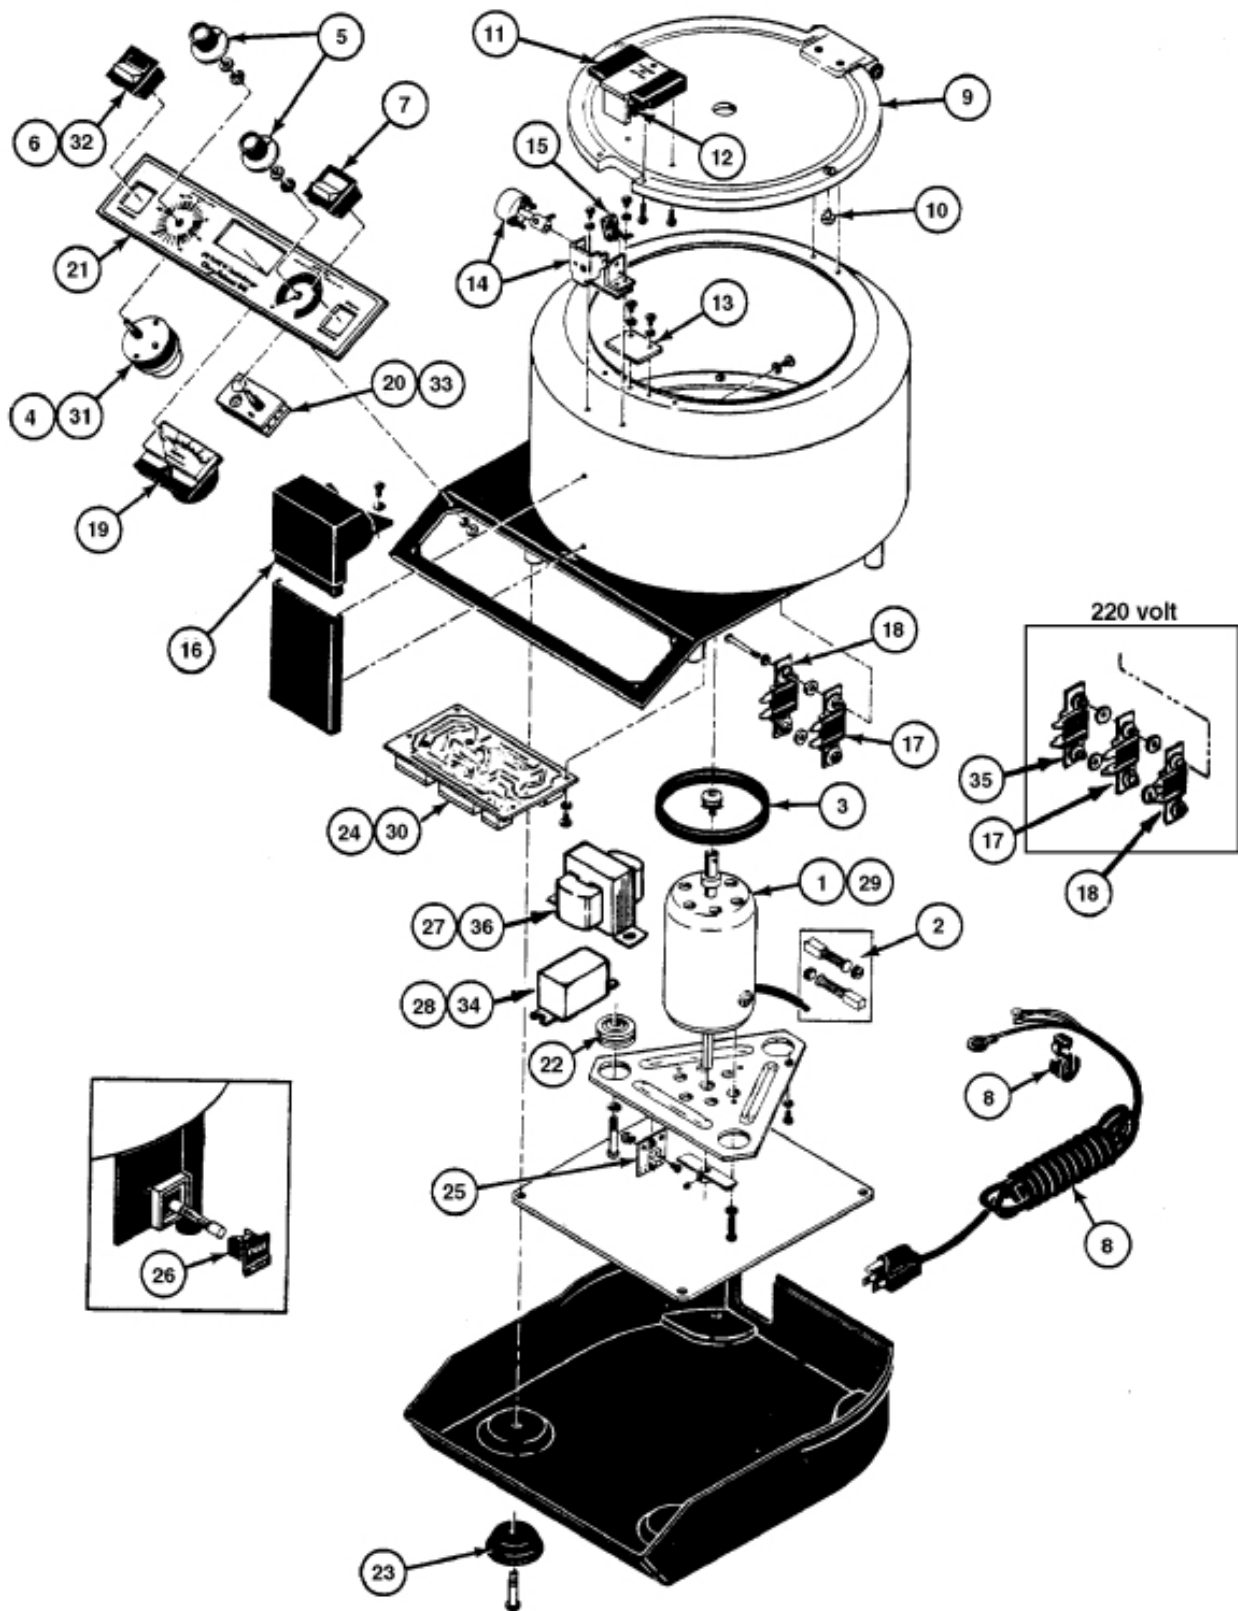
Exploded view of Dynac II centrifuge (continued).
